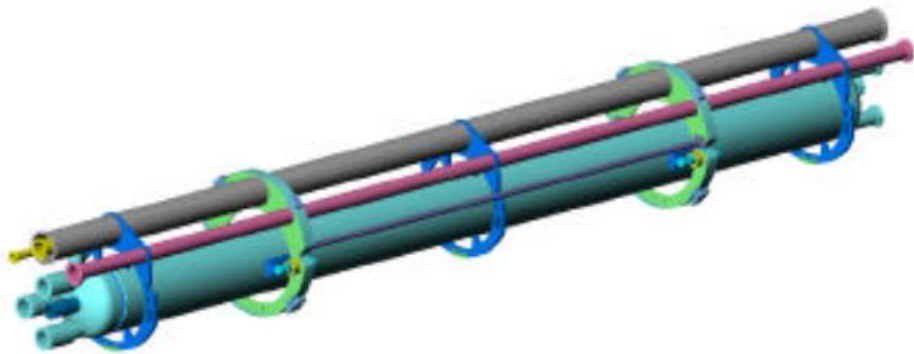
Internal Piping Assembly. (T. H. Nicol et al.)
